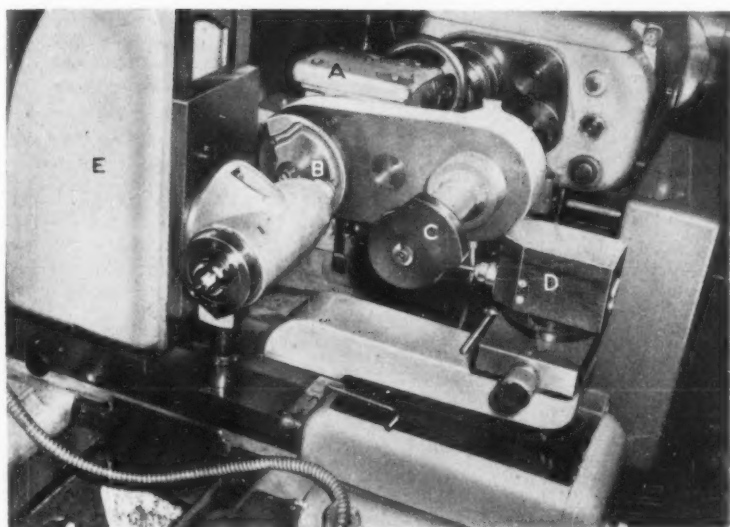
Set-up Incorporating a Special Work Head and a Universal Milling Head for Producing a Cam Form in a Selector Plate on a VDF Lathe Fitted with a Unicap Copying Attachment
